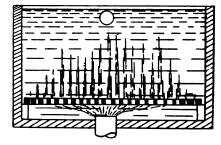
ALL PARTS OF THE WORK SHOULD BEEXPOSED TO THE LIQUID
